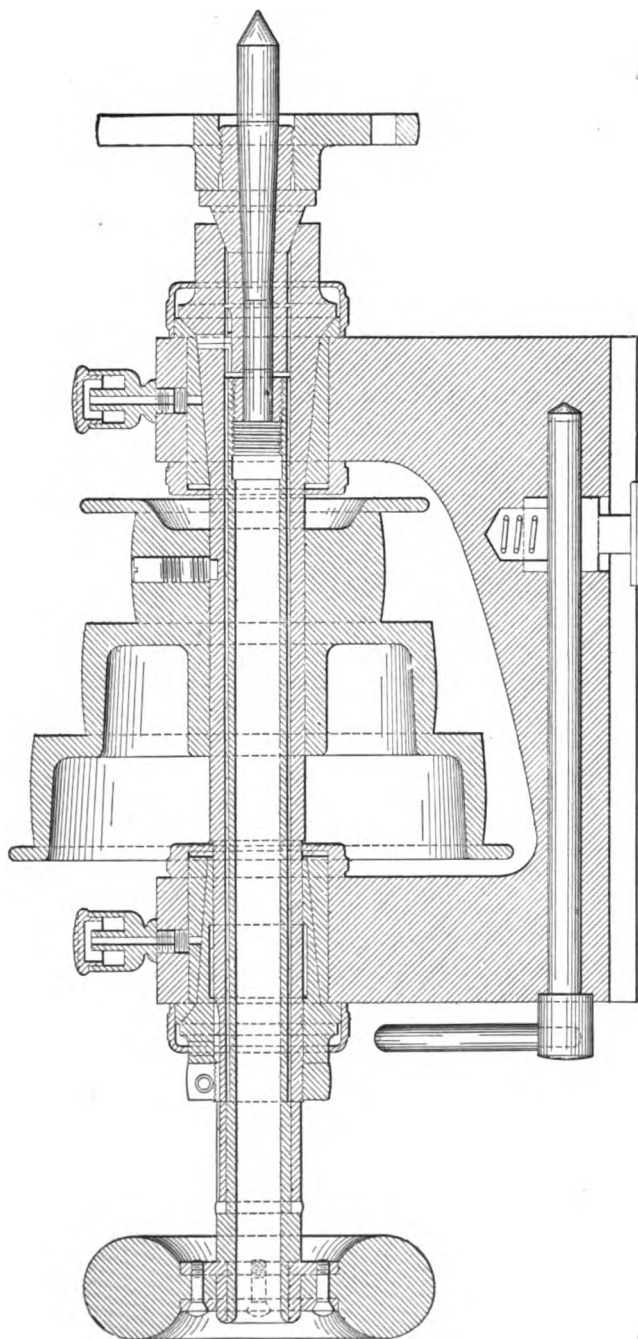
Bearings and Spindle of Bench Lathe Head-stock.
